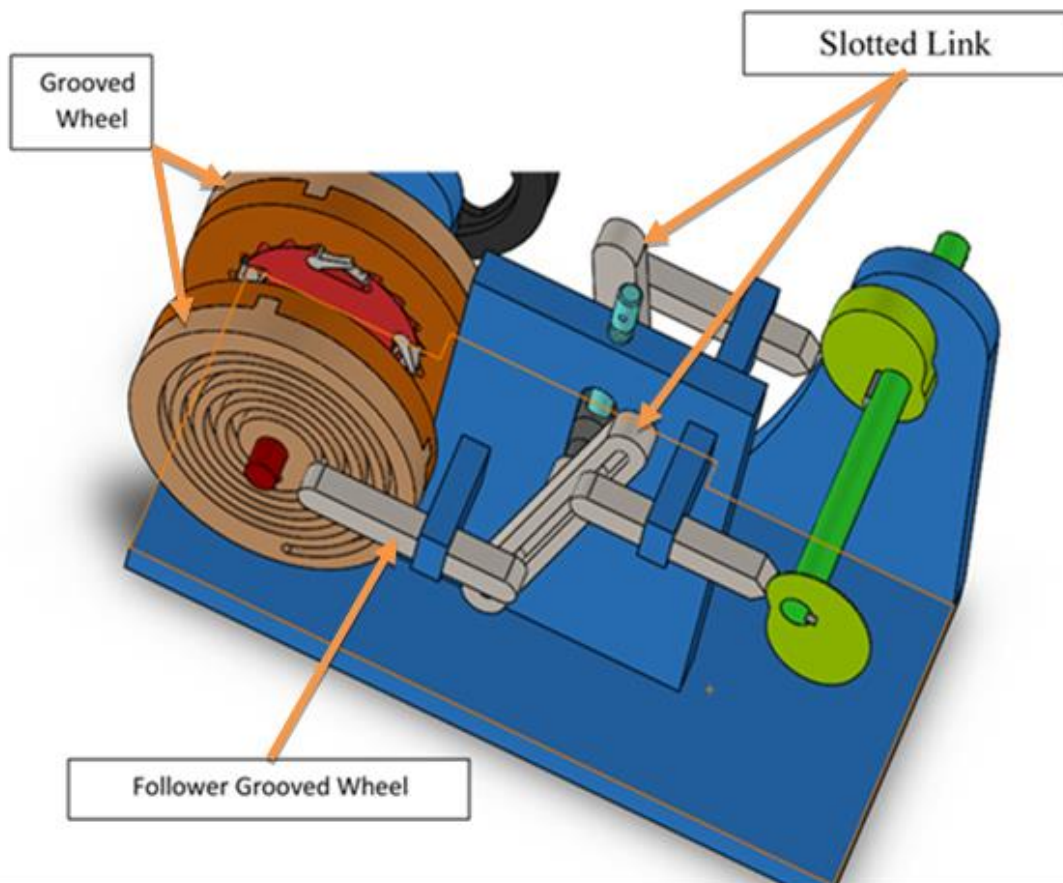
Connection between (Slotted Link, Grooved Wheel) and Follower Grooved Wheel.
